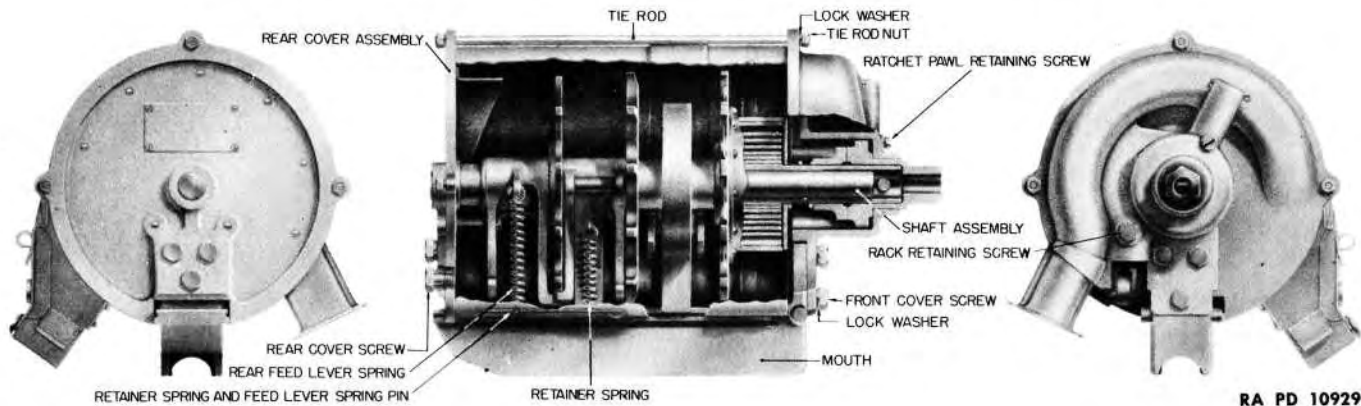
20-MM Feed Mechanism AN-M1 — Sectioned View
